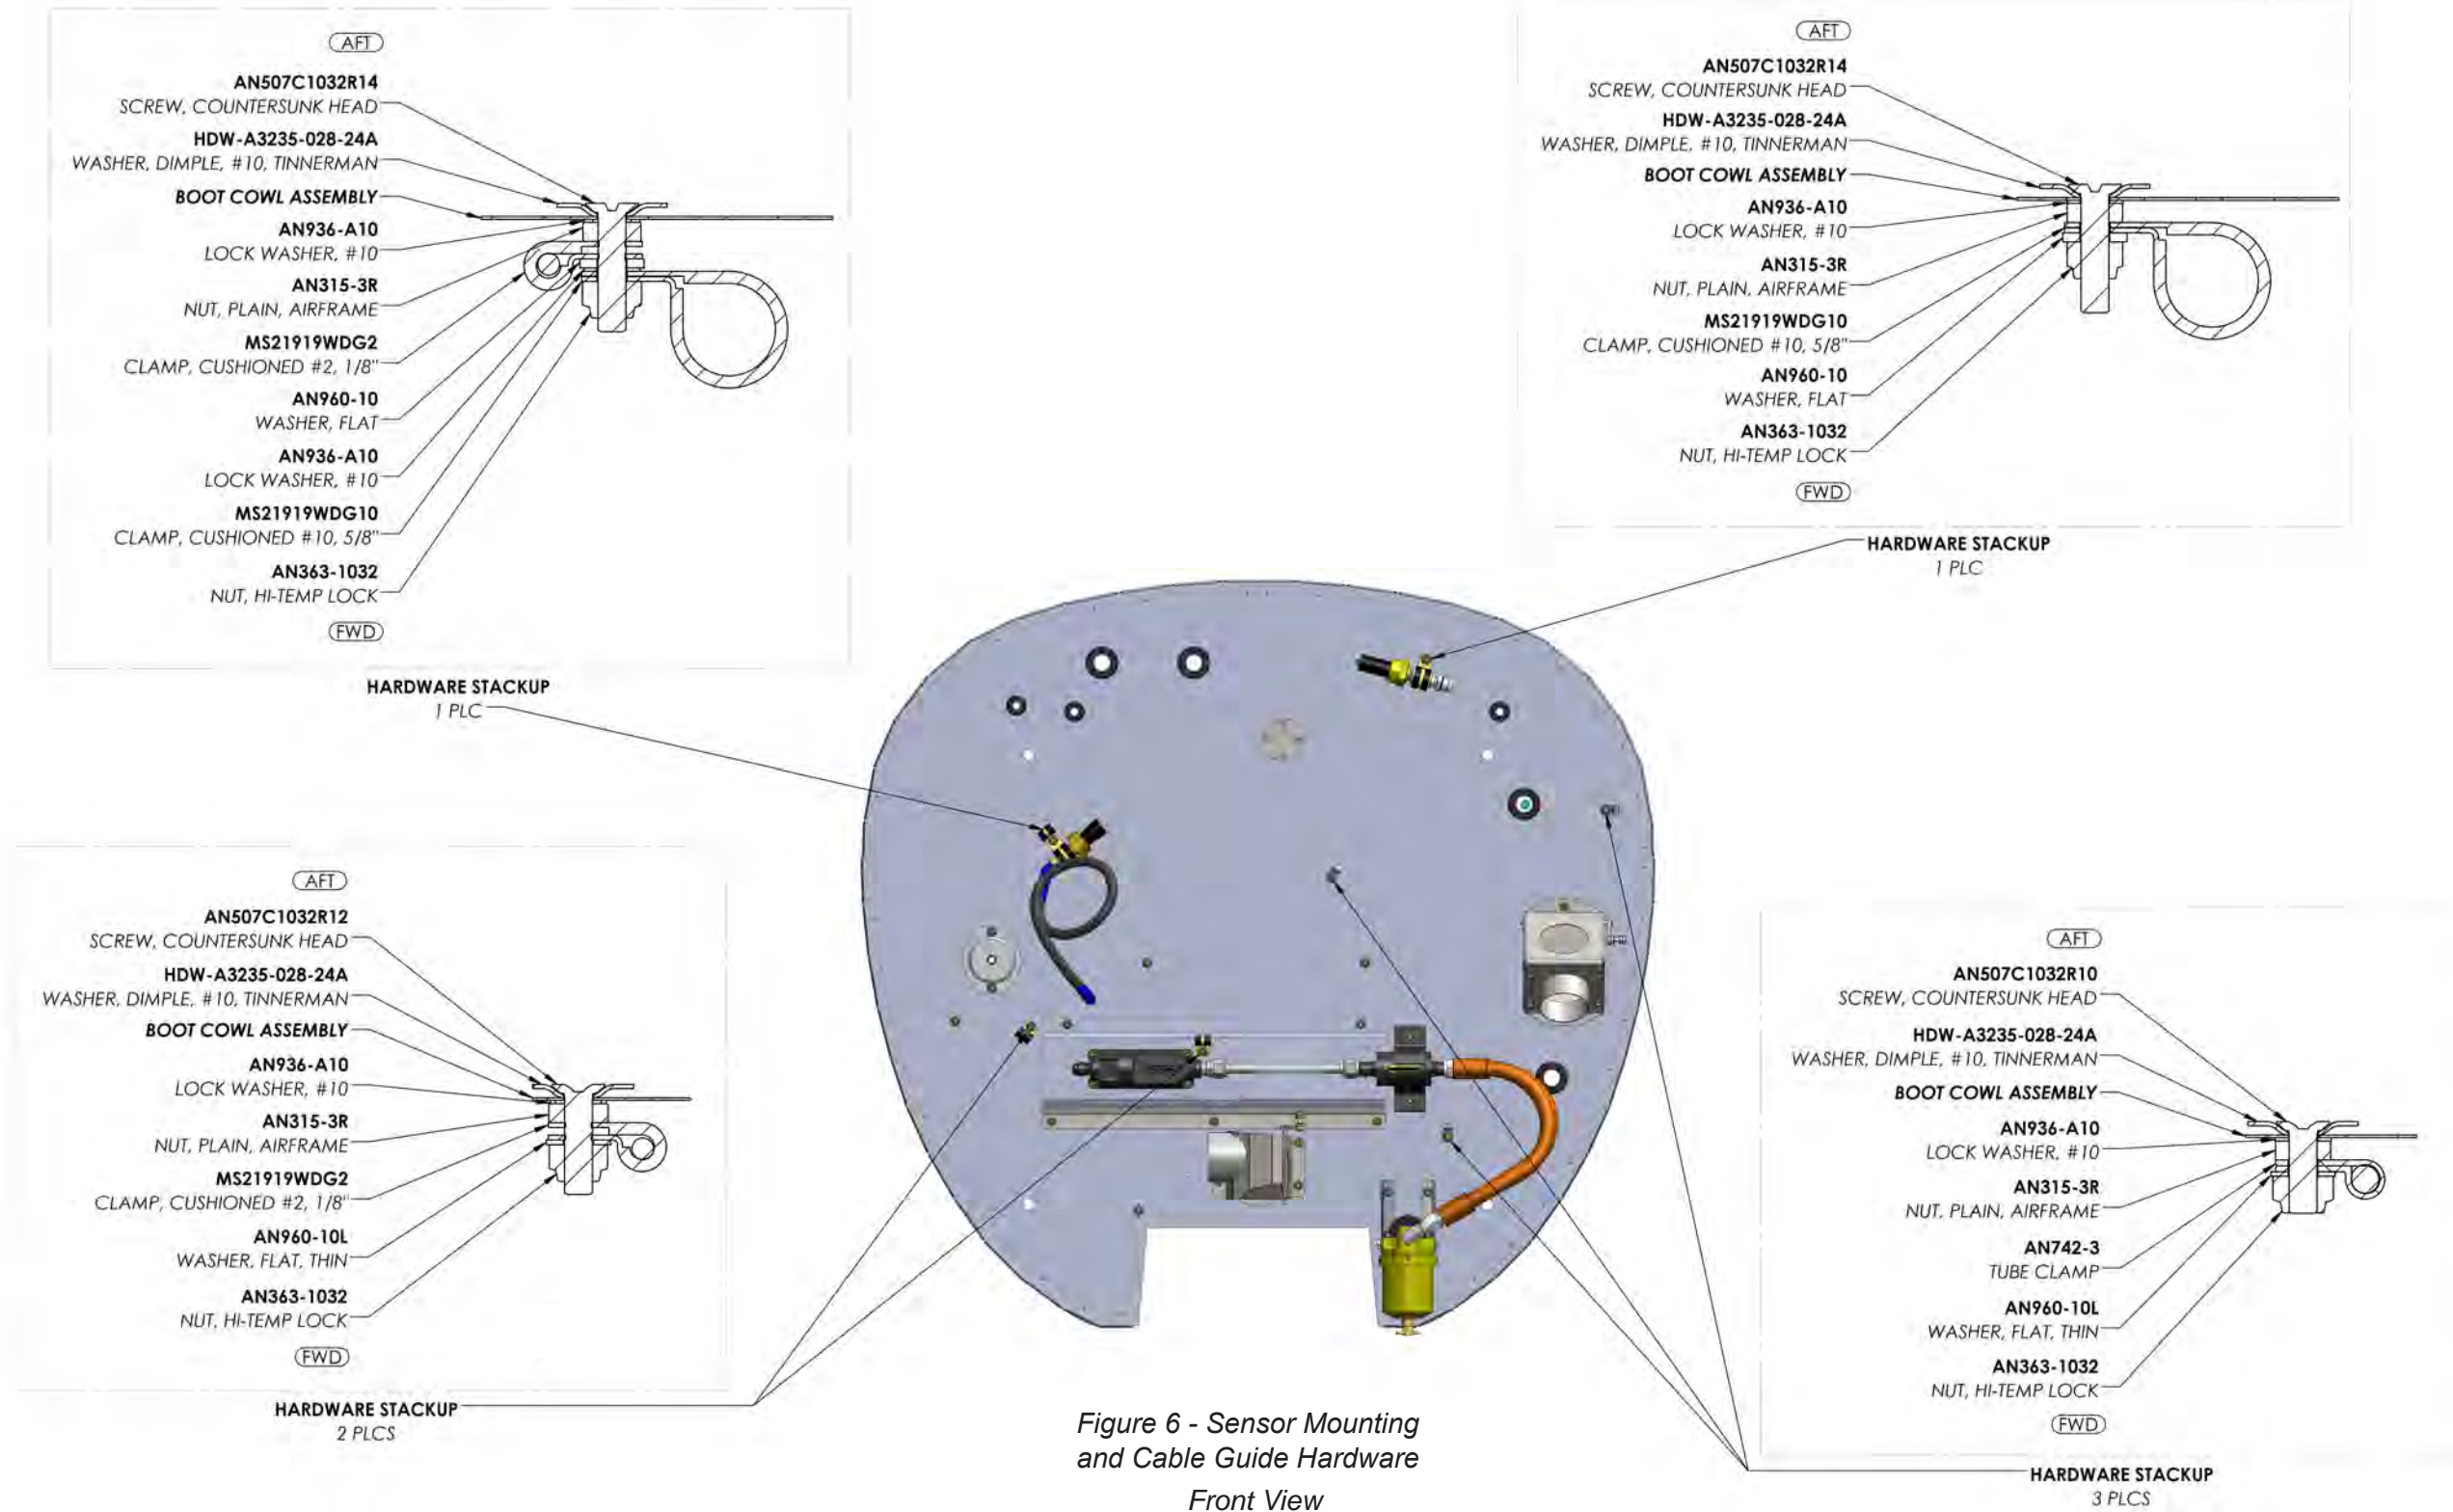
Sensor Mounting and Cable Guide Hardware Front View
